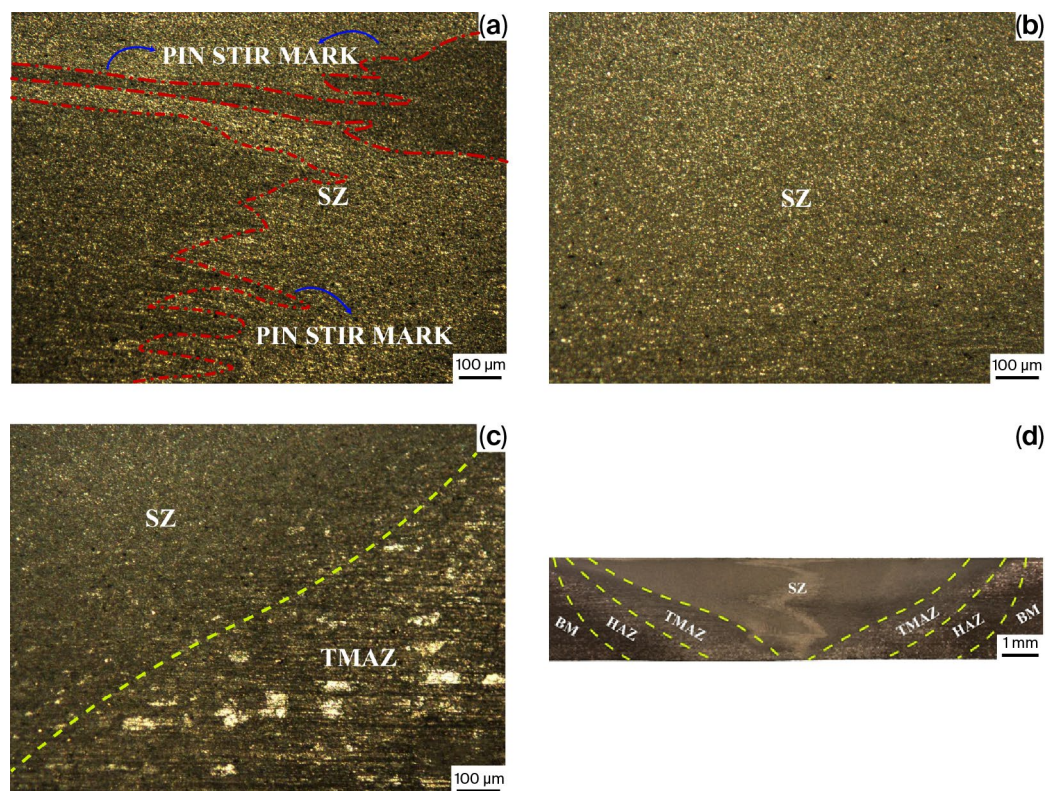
OM and macro images of Specimen 7's welding zone. (a) Pin stir mark is shown in SZ. (b) The fine-grained material structure in SZ. (c) SZ and TMAZ. (d) Macroscopic image of Specimen 7 showing weld region.
